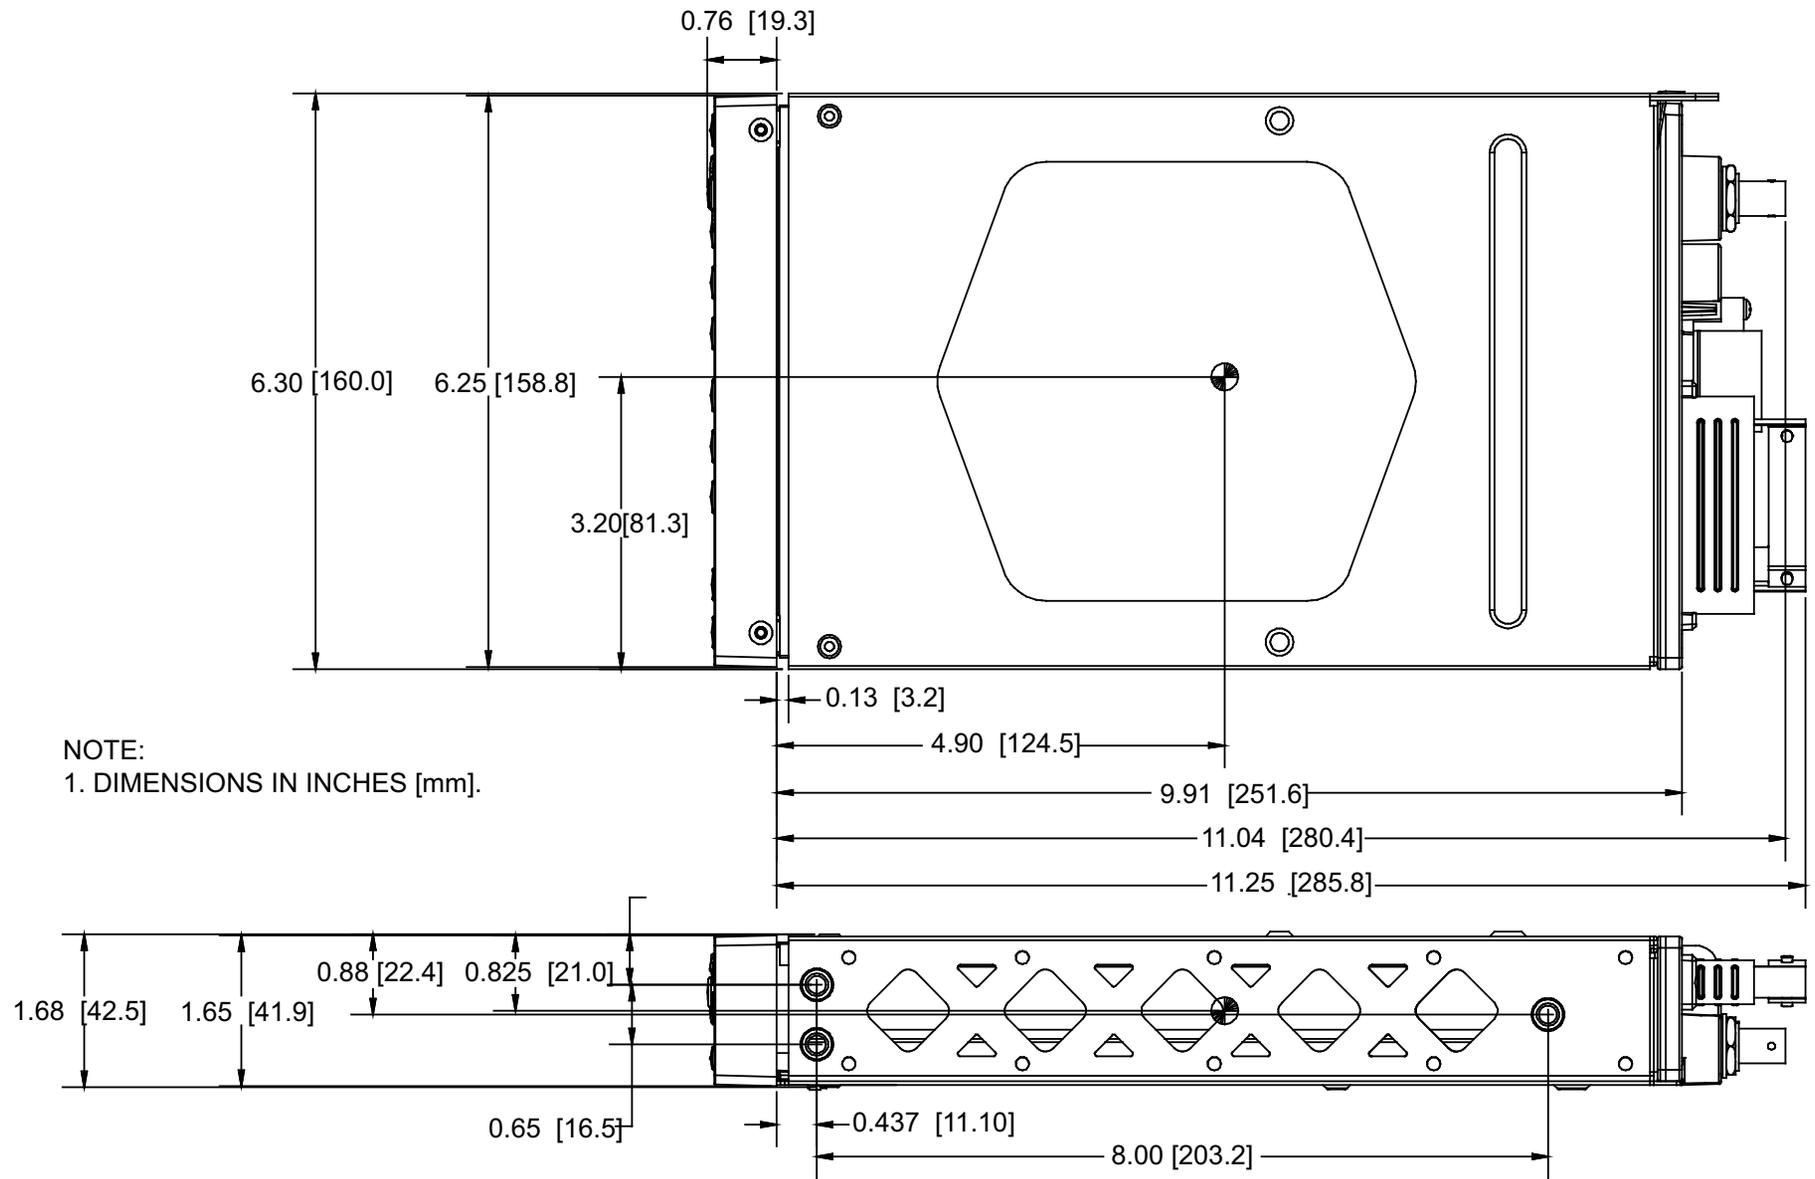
Typical GTX 330 Dimensions and Center of Gravity
